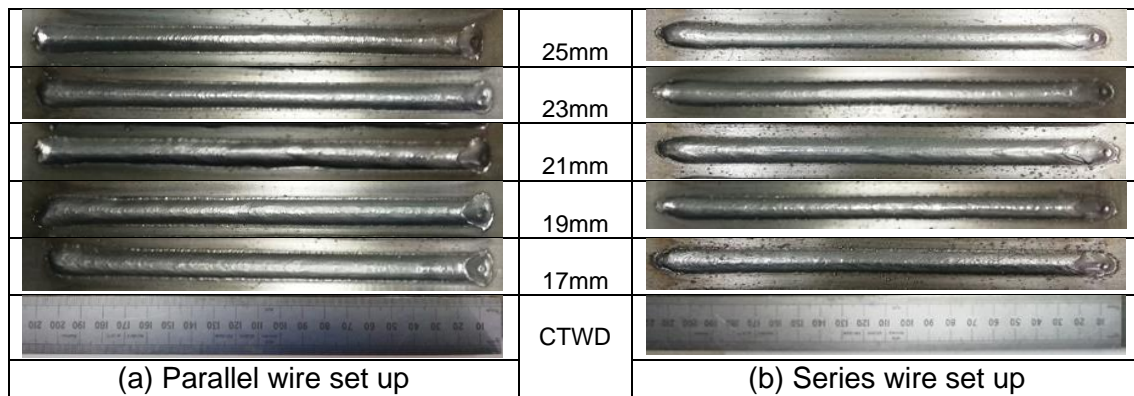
Weld bead surface appearances produced at different CTWD, and TS of 10mm/s, using Tandem-wire (a) Parallel configuration and (b) Series configuration.
